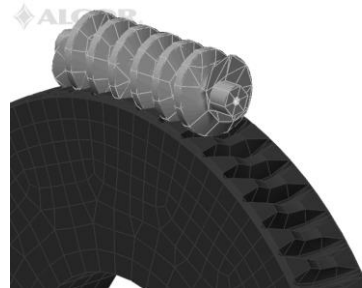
Geometric model and rotation couplers for the worm and the worm wheel (detail)
